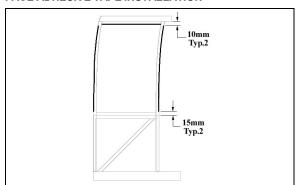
SIDE FIXED WINDOW - 1/4 X 1/2 DOUBLE FACE ADHESIVE TAPE INSTALLATION
